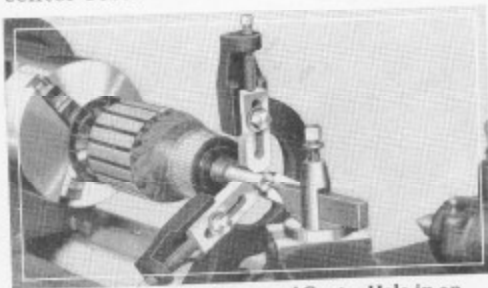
Restoring a Damaged Center Hole in an Armature Shaft
